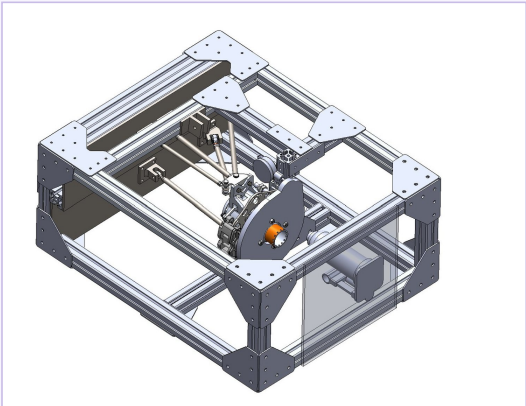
JIG ASSEMBLY WITH A CORNER FIXTURED FOR TEST
